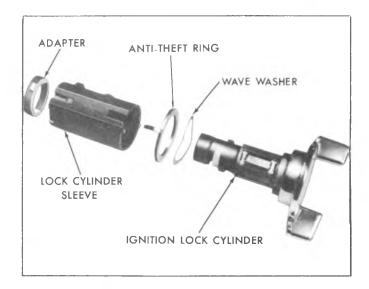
B-57--Ignition Lock Cylinder-Exploded
